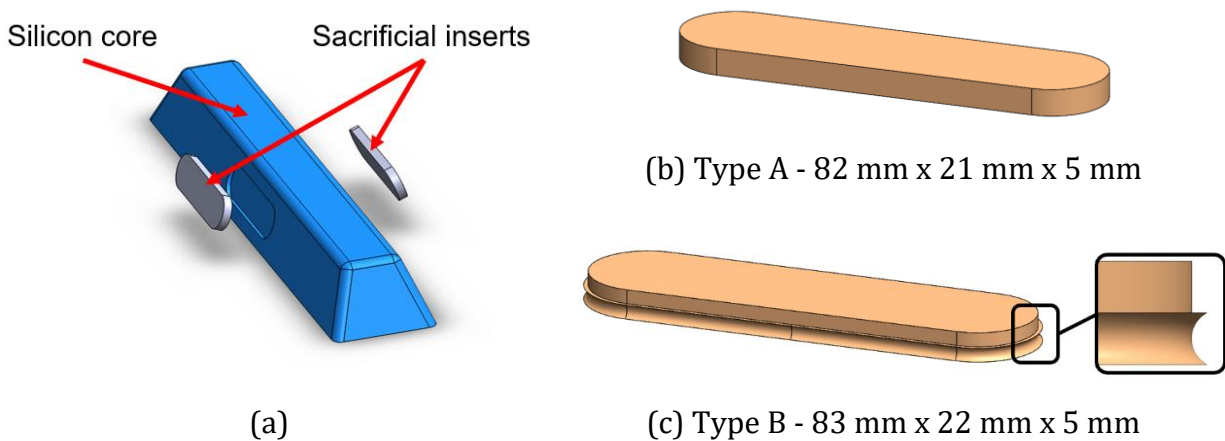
Insert geometries of omega benchmark. Overview of assembly with silicone core (a), 2.5D inserts Type A (b) and insert with integrated C-lip (c).
